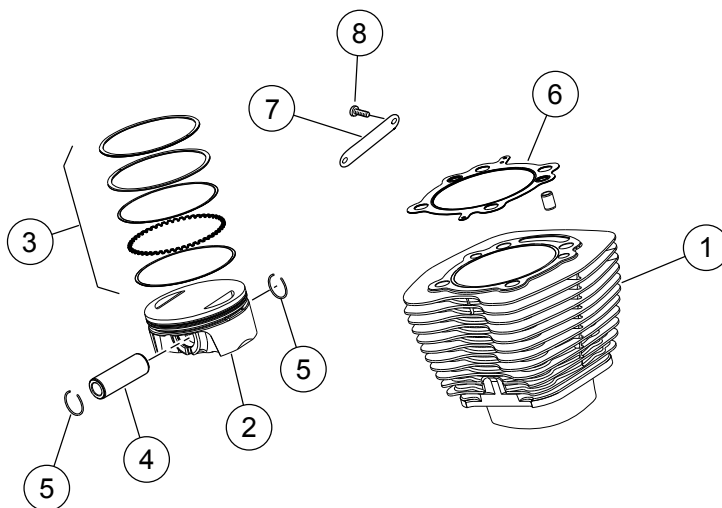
Service Parts: Screamin' Eagle Twin Cam 117 (1916 cc) Bolt-on Conversion Kit
